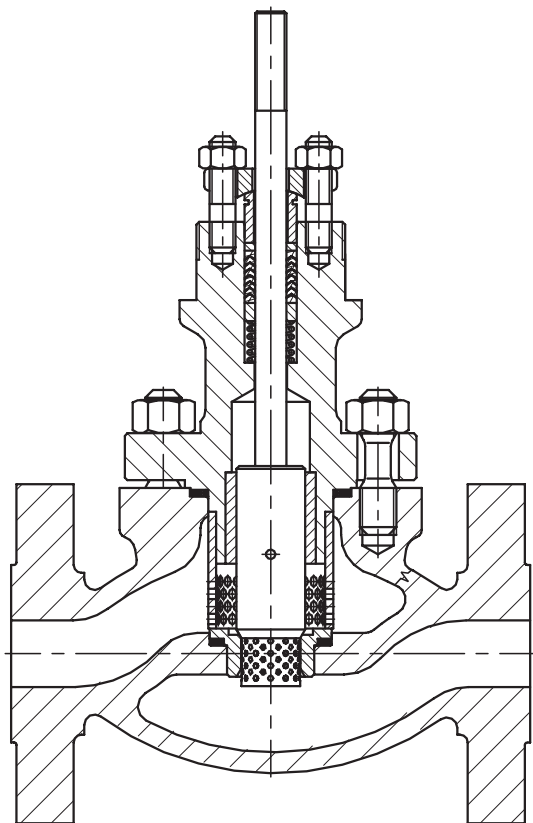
Valve Z1A - perforated valve plug and choke cage
